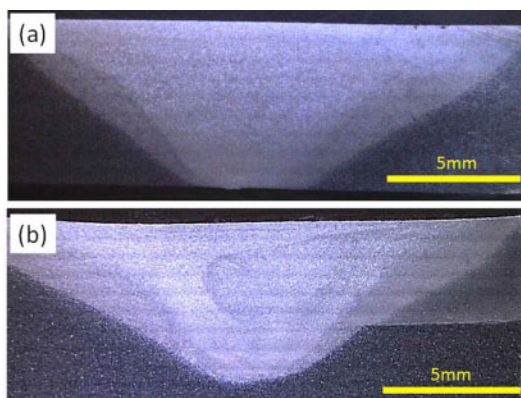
(a) Macrograph illustrating full penetration and a defect free weld nugget for the bottom butt weld. (b) Macrograph showing a defect free weld nugget for a top layer corner joint. The metal insert is on the right side, resulting in butt/lap joint geometry. The corner joint was welded with the FSW tool advancing side positioned on the lap interface.
